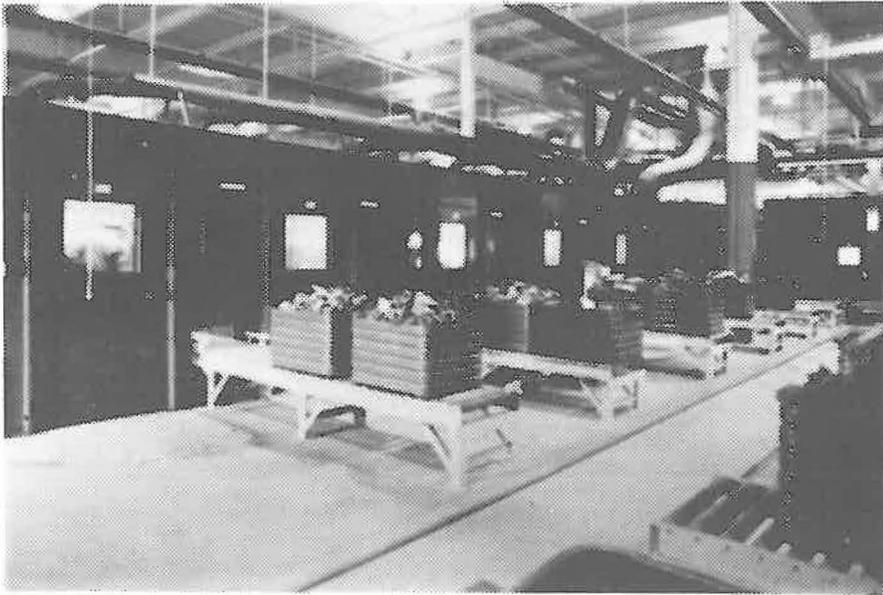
Row of small casting booths showing the inlet conveyors and casting bins.
